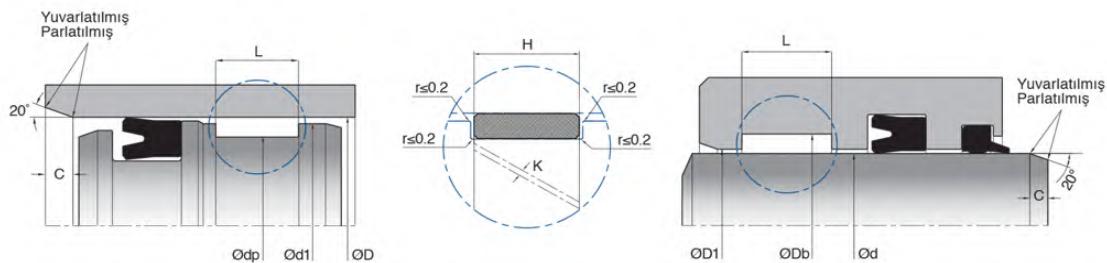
Design suggestion for K79 cylinder rod sliding bearing system from Kastaş A.Ş. [22].
